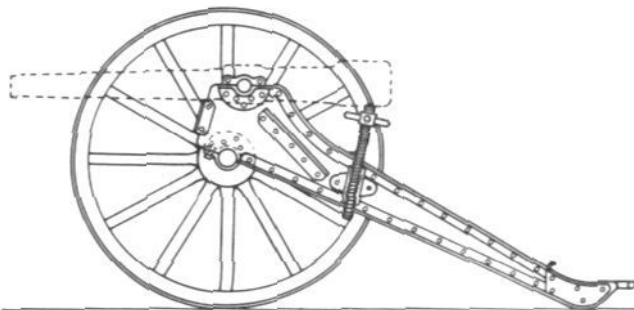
THE HOTCHKISS 12-LB. MOUNTAIN GUN.
